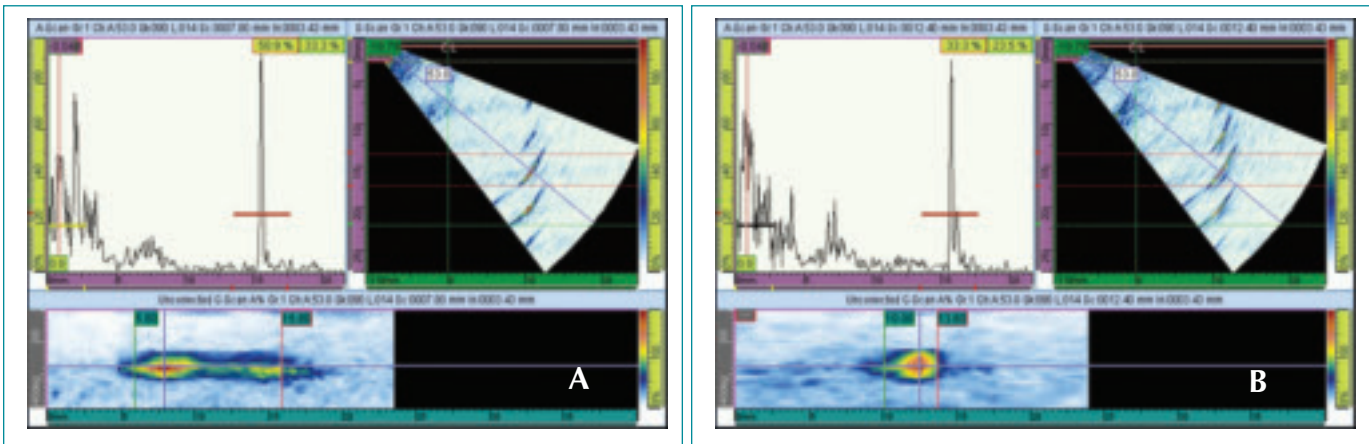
Detection of the OD end of the 1-mm through hole with the flat and curved probes (double skip) on 38-mm pipe. A — Flat probe. The measured size is 10 mm. B — focused probe. The measured size is 3.6 mm.
